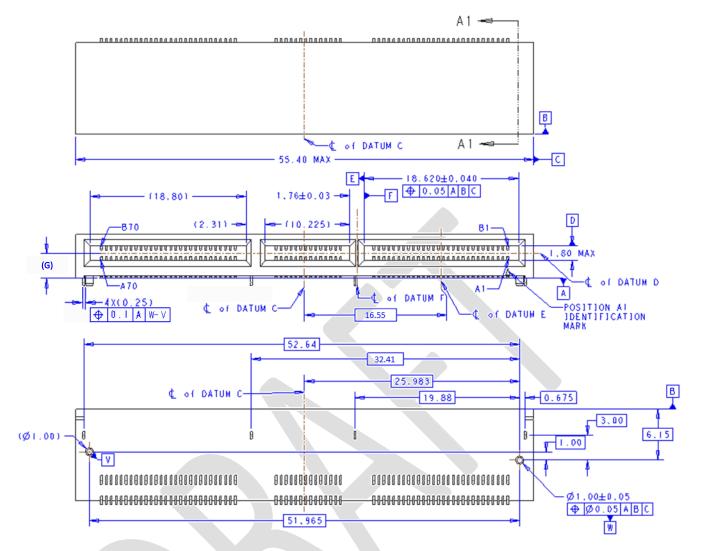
2C RIGHT ANGLE CONNECTOR DIMENSIONS
